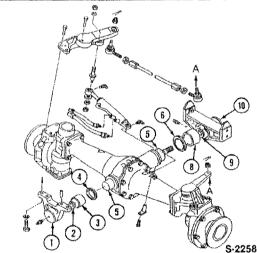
Front Axle Pivot Inspection Checks - Models 1320/1520 Shown
